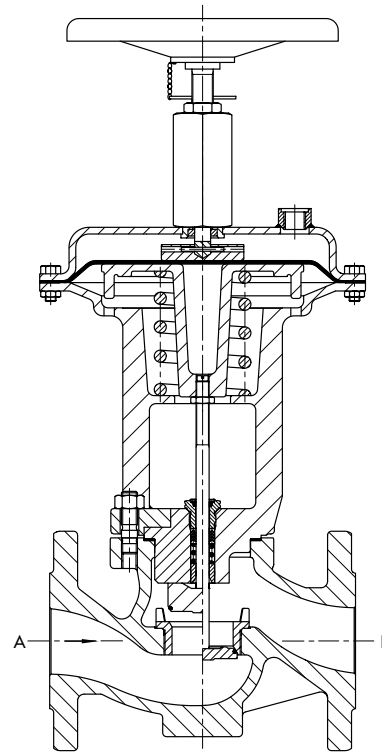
· Type 3351-1 Pneumatic On-off Valve with handwheel
